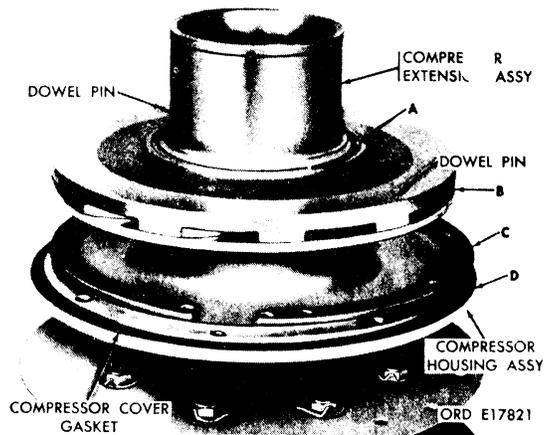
REMOVING OR INSTALLING COMPRESSOR EXTENSION ASSEMBLY - TURBOCHARGERS, 7748900 AND 10935279.
